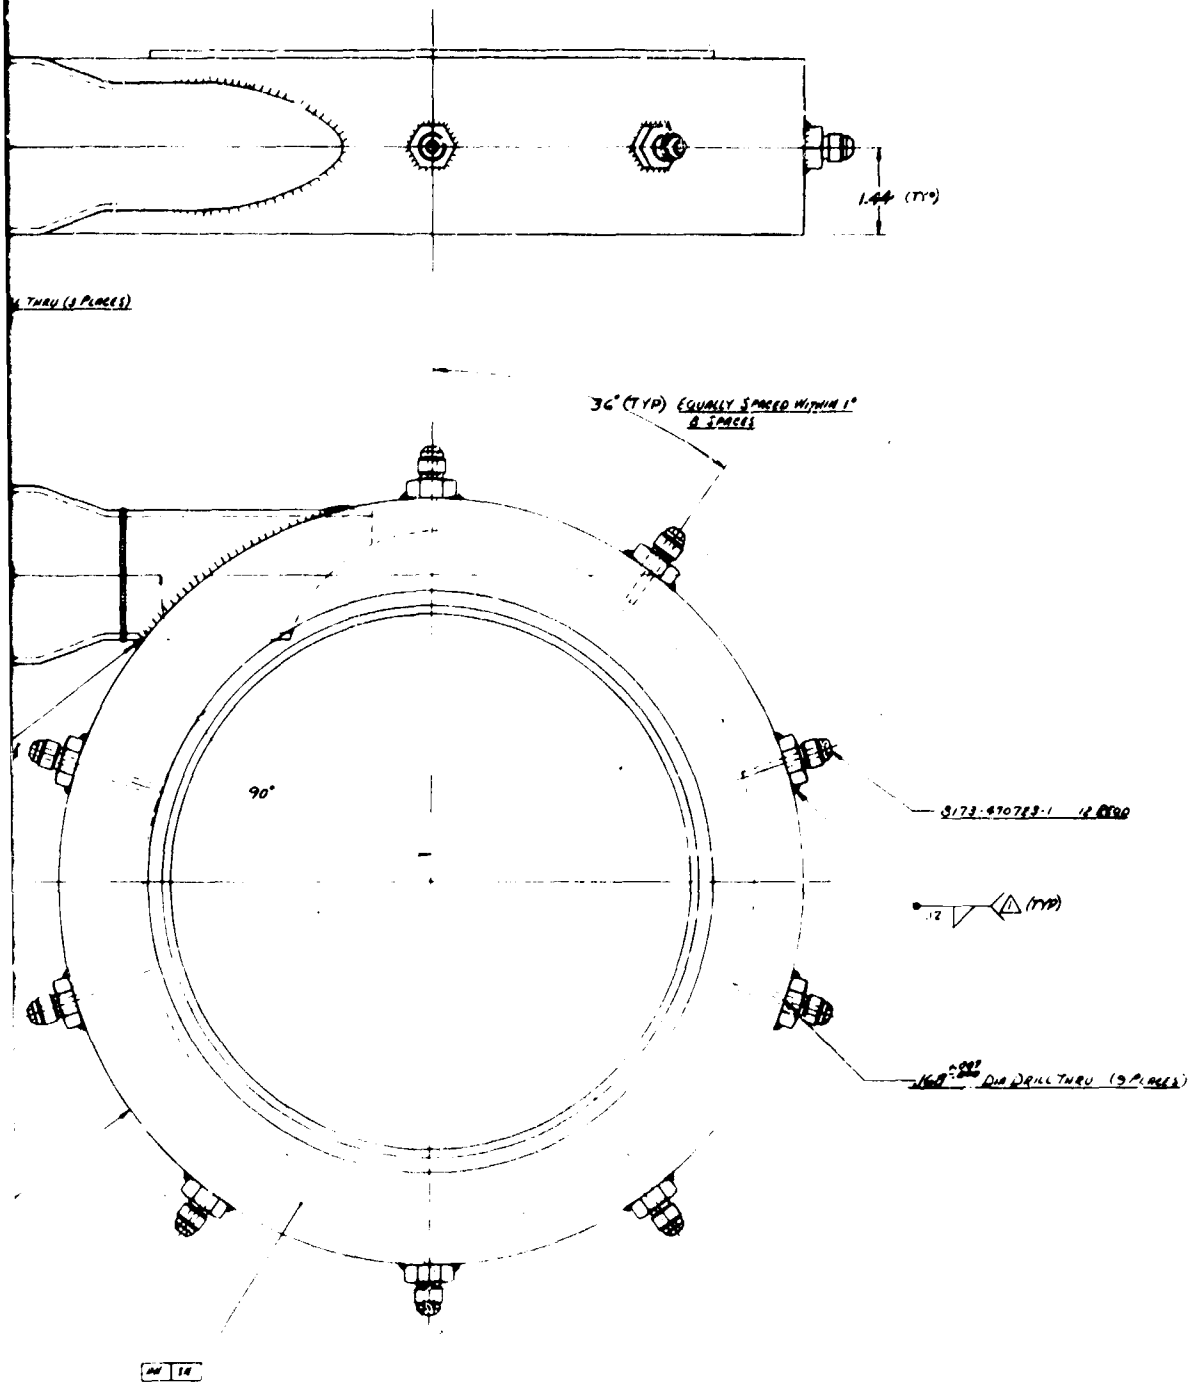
(U) Fuel Rich Gas Generator - Auxiliary Manifold Assembly
